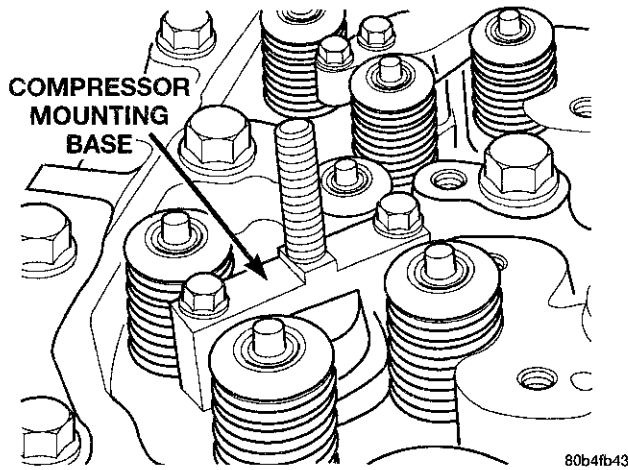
Spring Compressor Mounting Base—Part of Tool 8319
